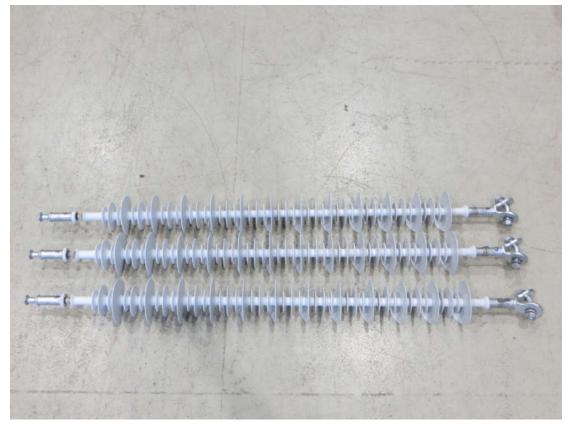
Test samples No. 6, 7 and 8 after mechanical failing load test
